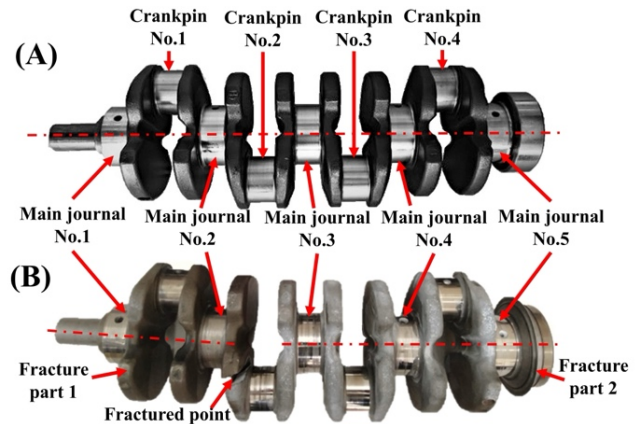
Crankshaft nomenclature; (A) the new crankshaft; (B) the broken crankshaft and fractured position
